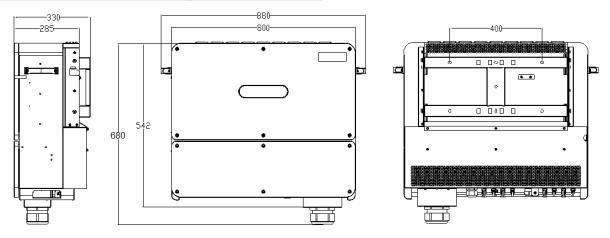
Structural dimensions of hopeSun series (right, front, back, unit: mm)
